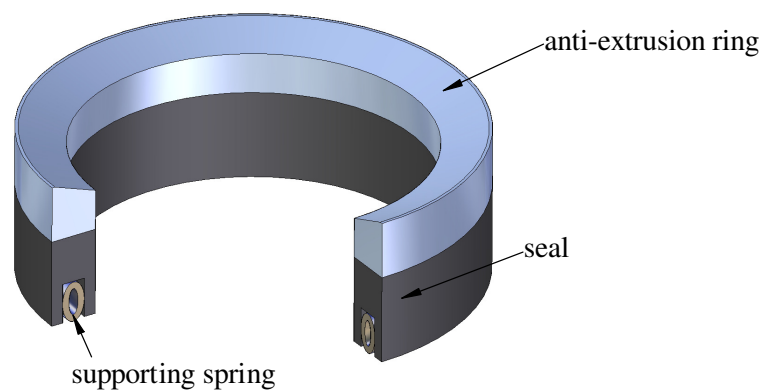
The high-pressure reciprocating seal by BalSeal.
